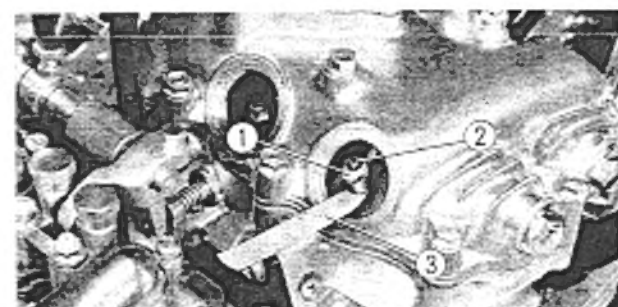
① Lock nut ② Adjusting screw ③ Feeler gauge
